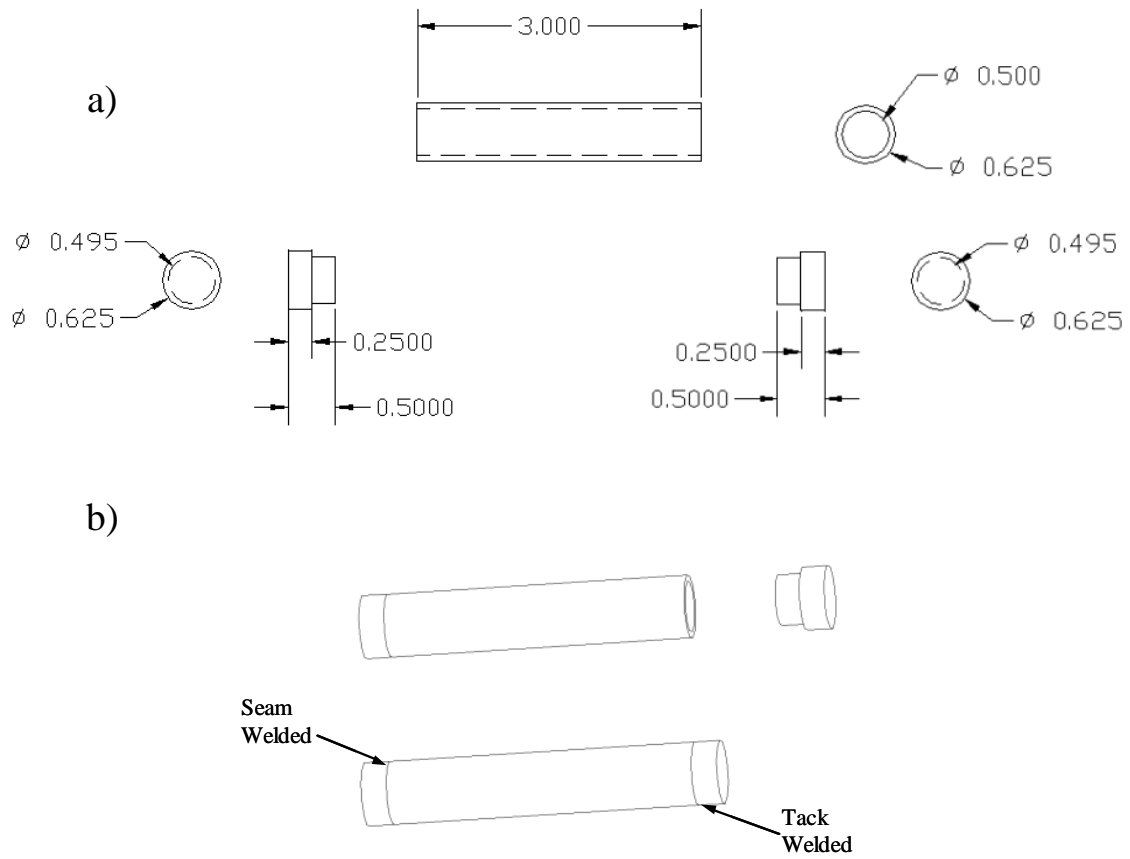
HIP canister design. (a) Diagram and dimensions of HIP canister and (b) assembled canister showing weld locations.
